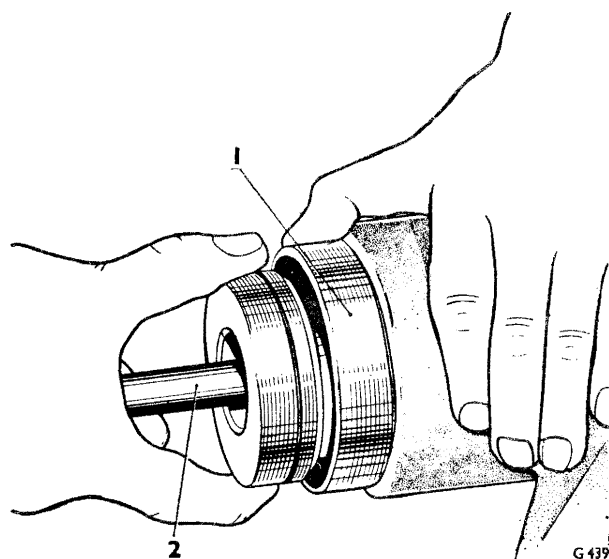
INSTALLING RACK-PISTON SEAL COMPRESSOR
